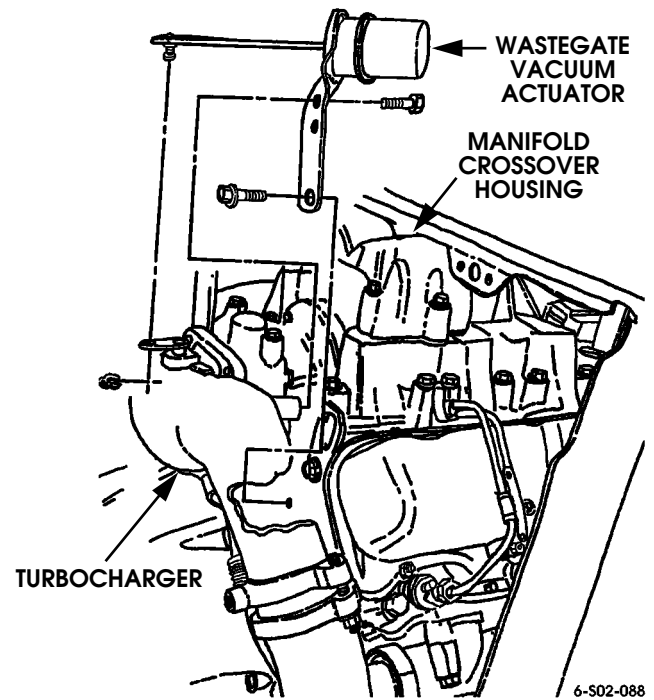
Turbocharger and Vacuum Actuator Mounting
